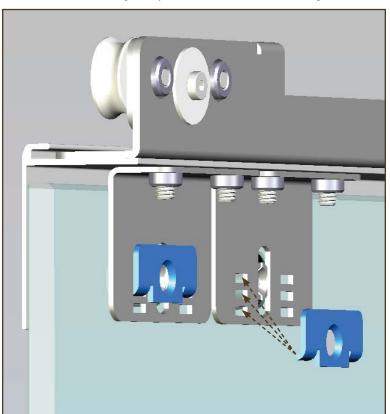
Slide Glass (with Retainer Weldment, Retainer Pad, and Support Spacers attached) within the Glass Hanger Assemblies.
